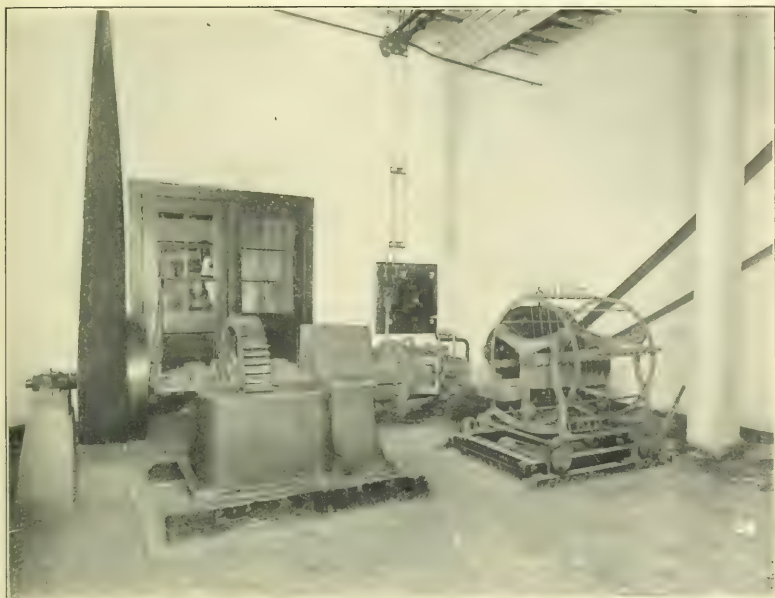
BRICK MACHINE AND UNIVERSAL CUTTER.
